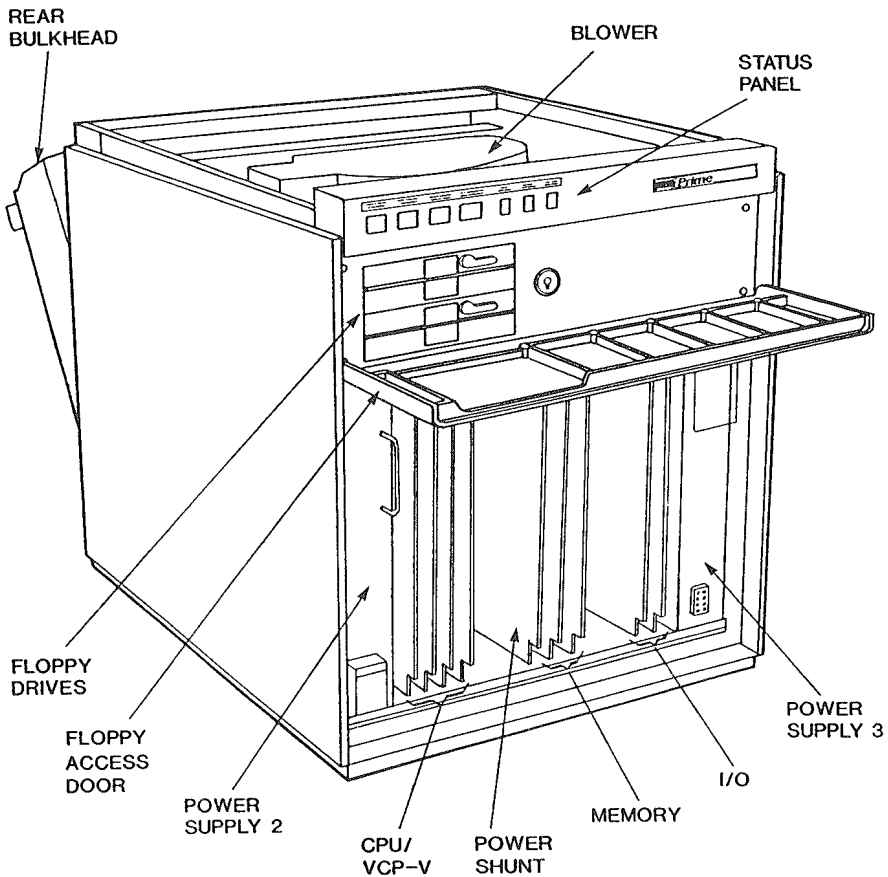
MAJOR SYSTEM ASSEMBLIES
